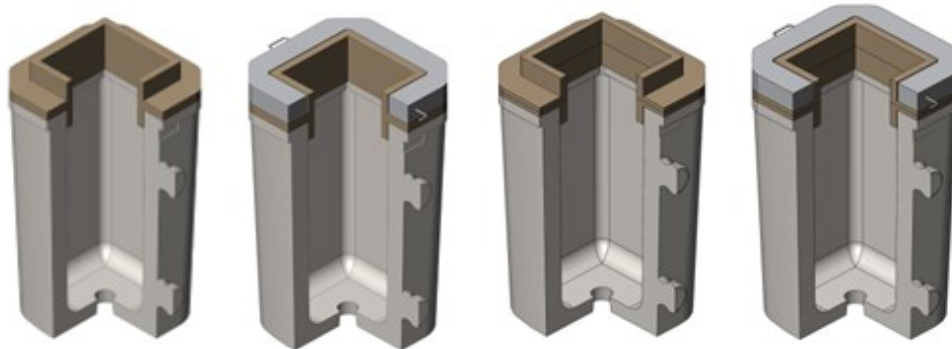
Installation examples of a solid and assembled insert with a weighting element in a square cross-section mold.
